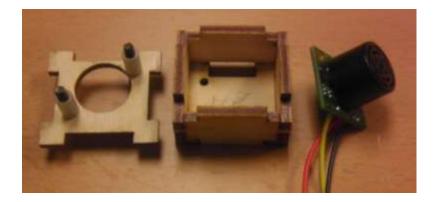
DISASSEMBLE ULTRASONIC SENSOR CASING WITH "UP" LABEL ON BOTTOM PLATE
